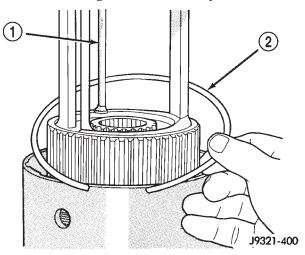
Direct Clutch Pack Snap Ring Installation 1 – SPECIAL TOOL 6227–1
